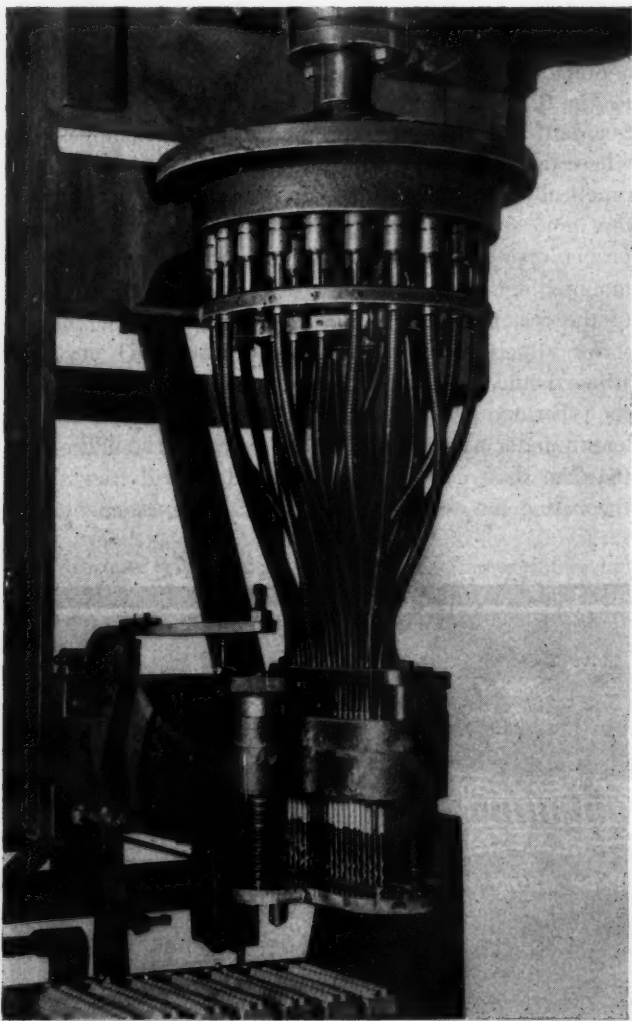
Flexible shafts provide unusual versatility in this 38-spindle universal drilling machine
